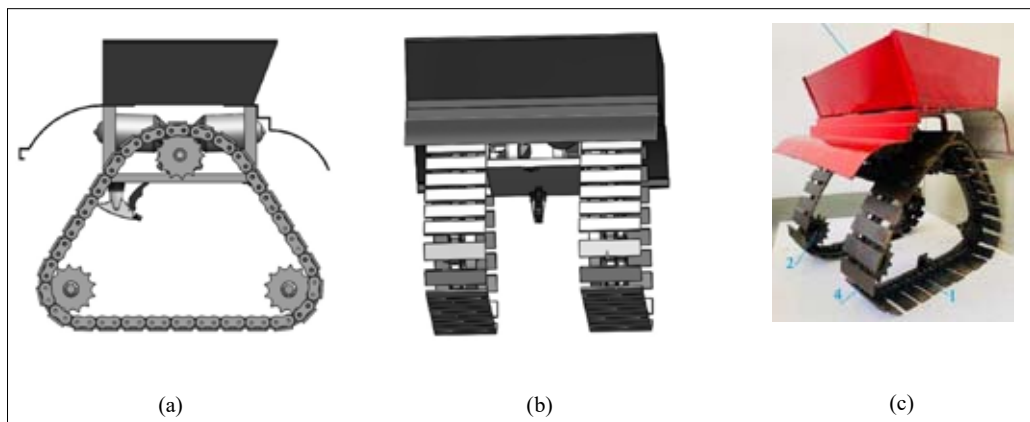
Weedex, (a) side view of the design (b) front view of the design (c) final Prototype
